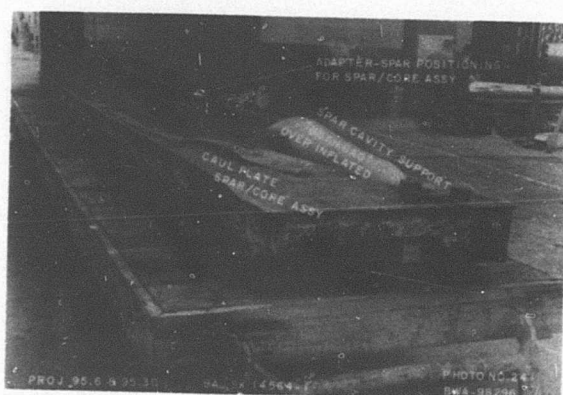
Blade Assembly Bonding Jig - Multipurpose Use A.
